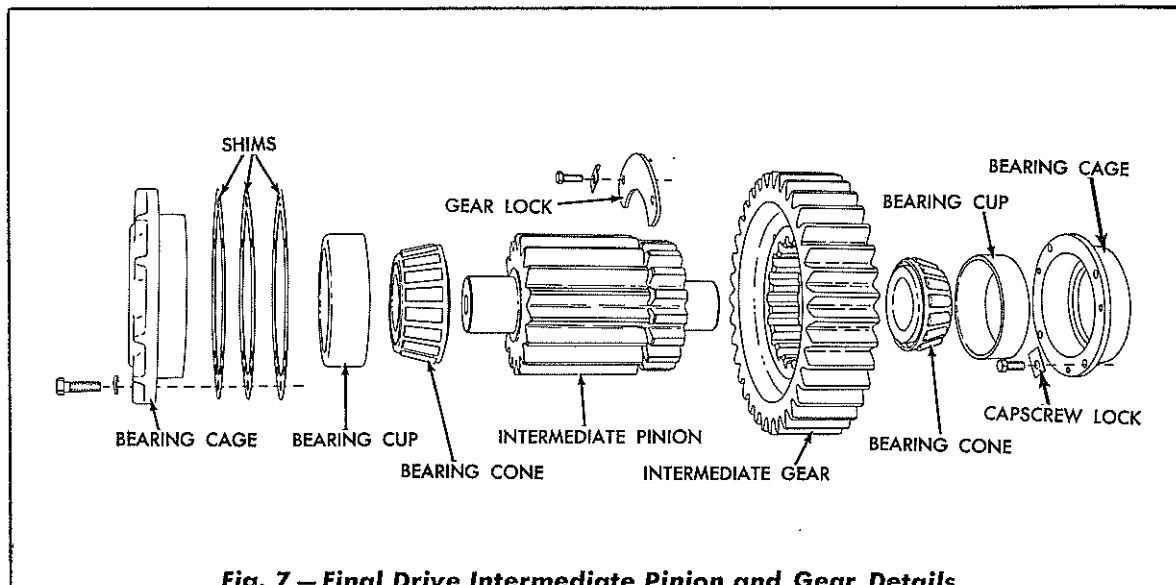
Final Drive Intermediate Pinion and Gear Details
